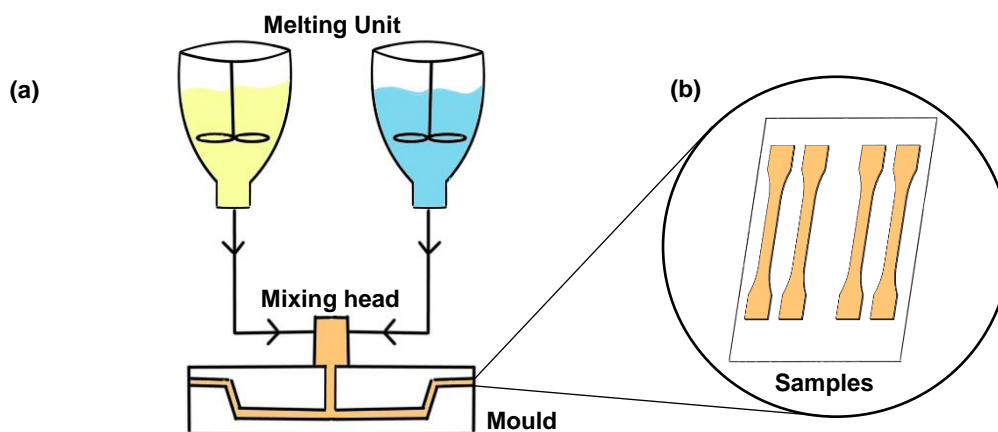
Schematic representation of T-RTM process (a) and mould shape (b) with tensile specimens employed.
